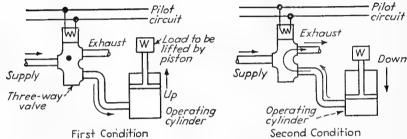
Three-way valve provides convenient means of controlling single-acting cylinders or diaphragms. By utilizing principle shown in Fig. 470, valve cuts off supply and vents delivery through exhaust, thus permitting return stroke of piston to take place.
